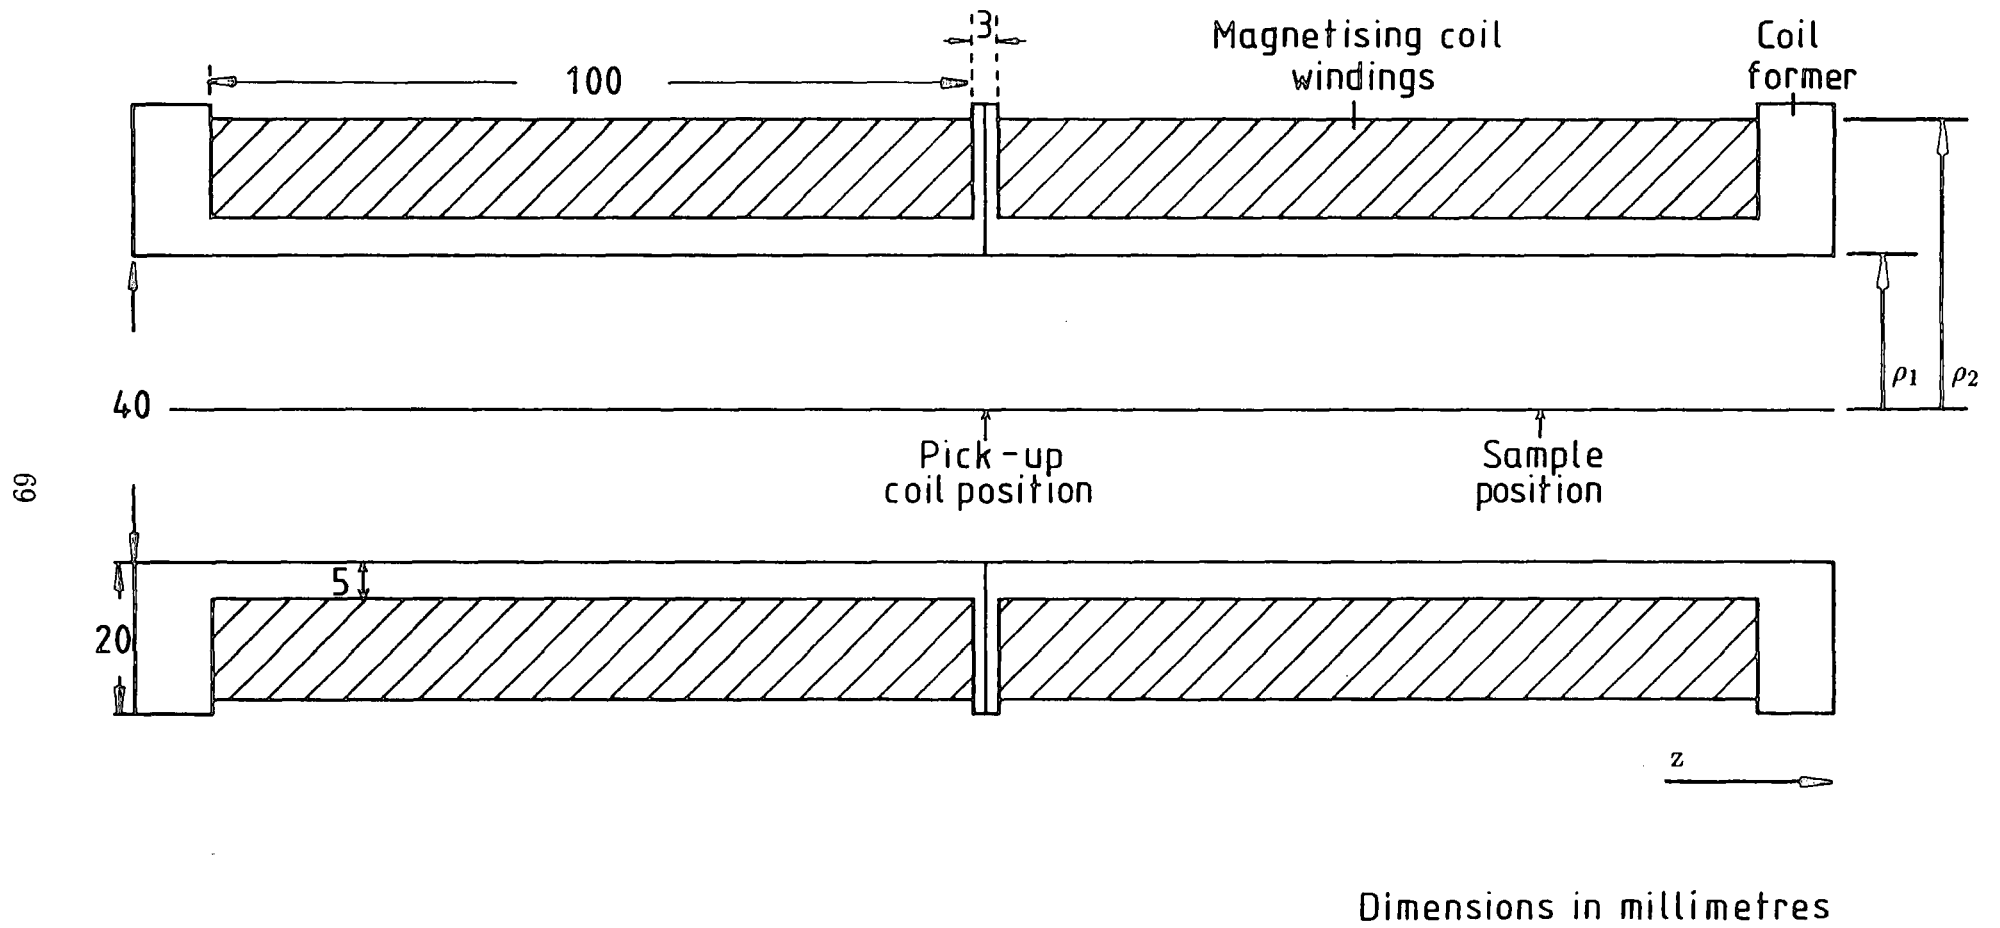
Details of the Barkhausen Magnetising Coil. Windings. (Courtesy of Dr. A.J. Birkett)
